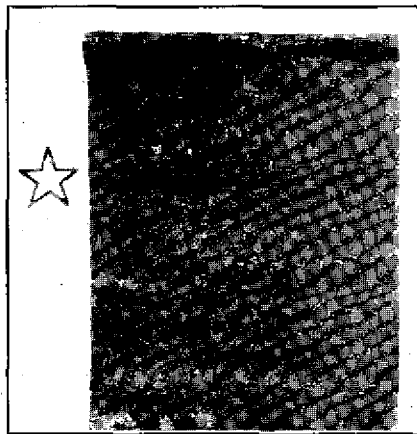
Side view of the head of the 130-pound rail, fractured surface showing longitudinal seam which caused its rupture. Star put on cut abreast the seam for identification.
